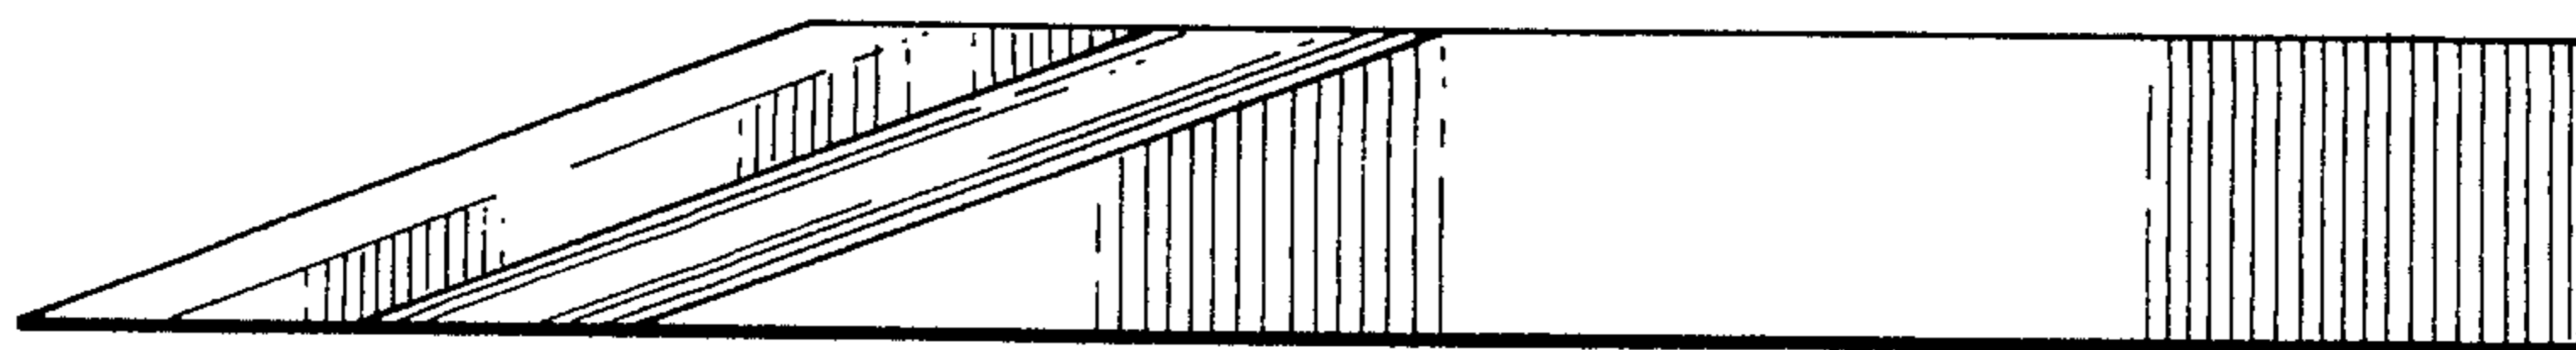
is a side elevational view of a conform scraper tool, showing my new design;
